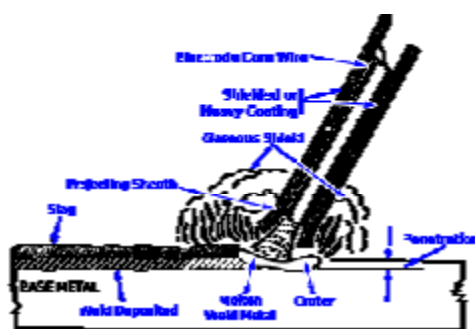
Shielded Metal Arc Welding Diagram
